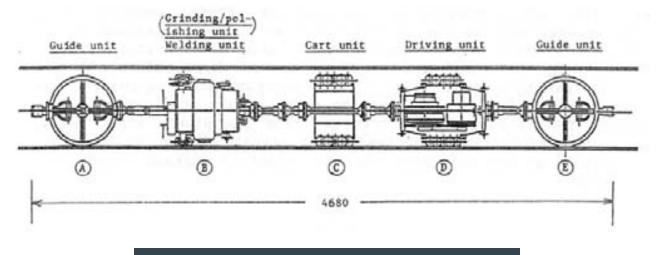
Osaka Gas Co./Sumitomo Metal Model; Internal Welding Robot system.
